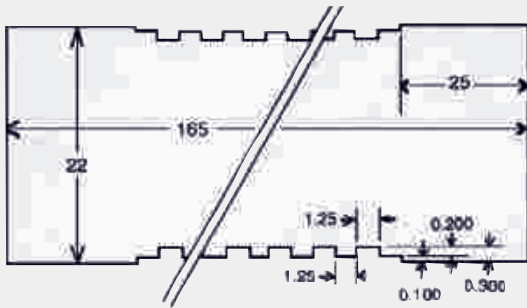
Details from the engineering drawing. Dimensions are in millimeters. Plastic arms are illustrated in Fig. 1 above.
